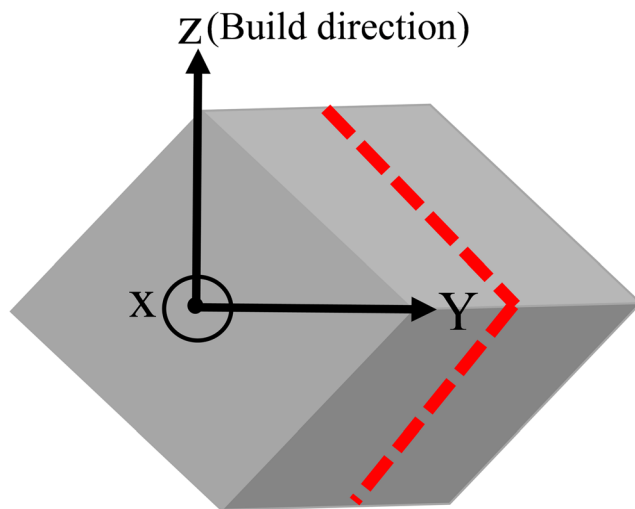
Fabricating and sample cutting (red plane) orientation of the SLM as-manufactured samples
